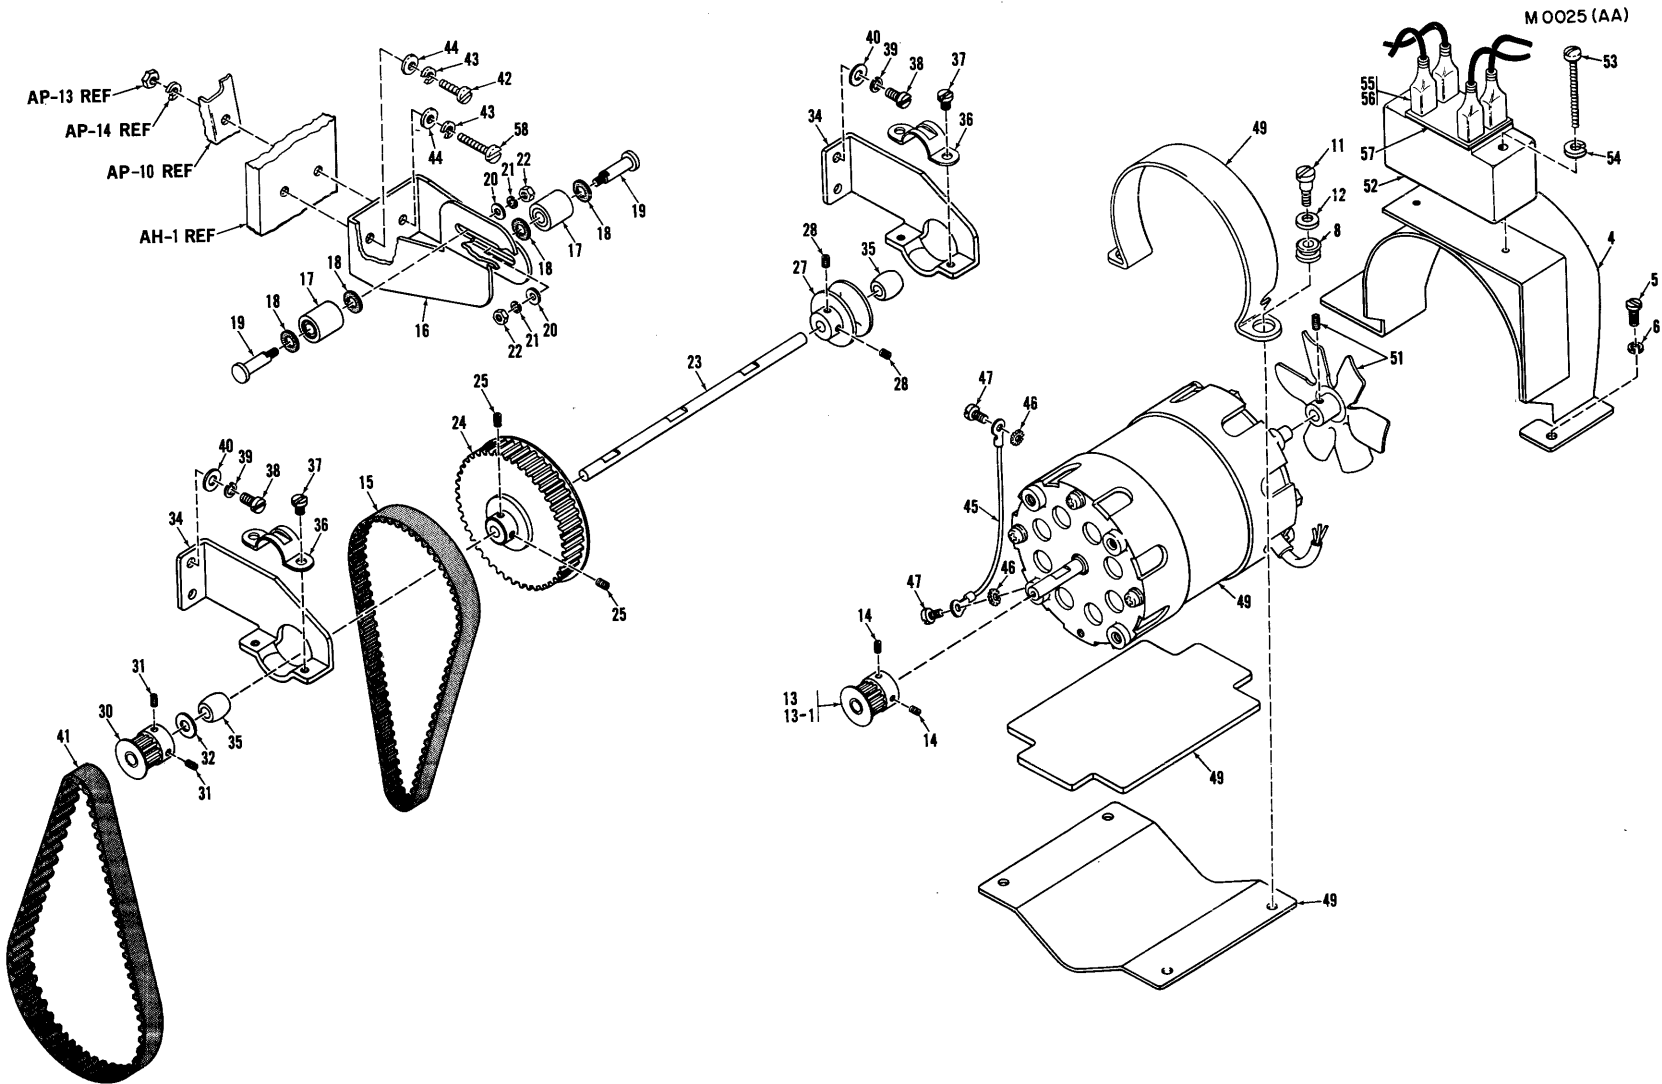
DRIVING MECHANISM (PART 1) – AD
